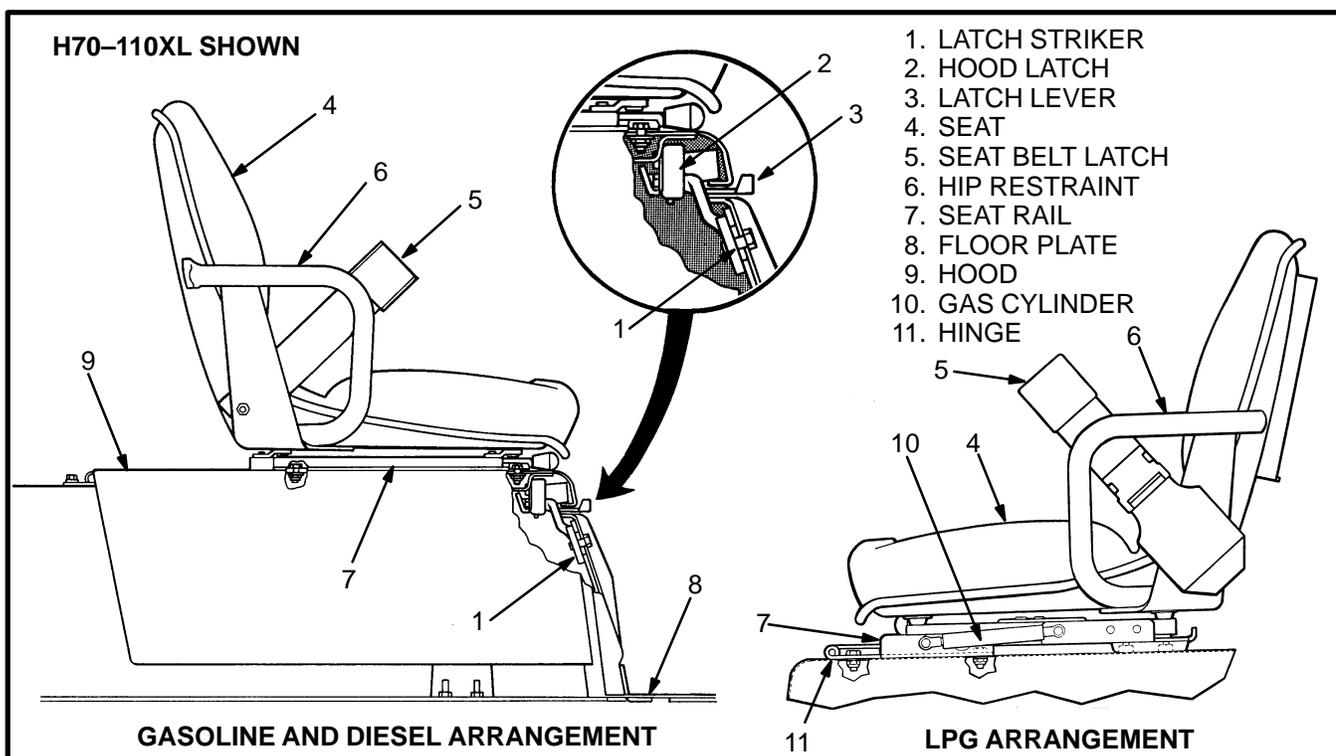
CHECK THE HOOD AND SEAT LATCHES
